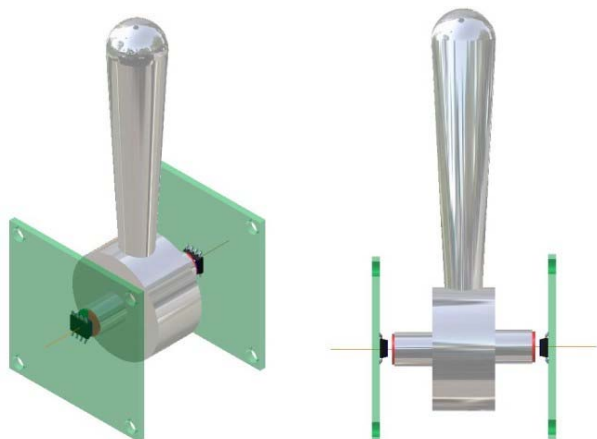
The 2-axis IC and associated electronic circuitry located inside a non-magnetic metal housing can also sense rotation of a mechanism through a metal structure such as a valve shown here.
